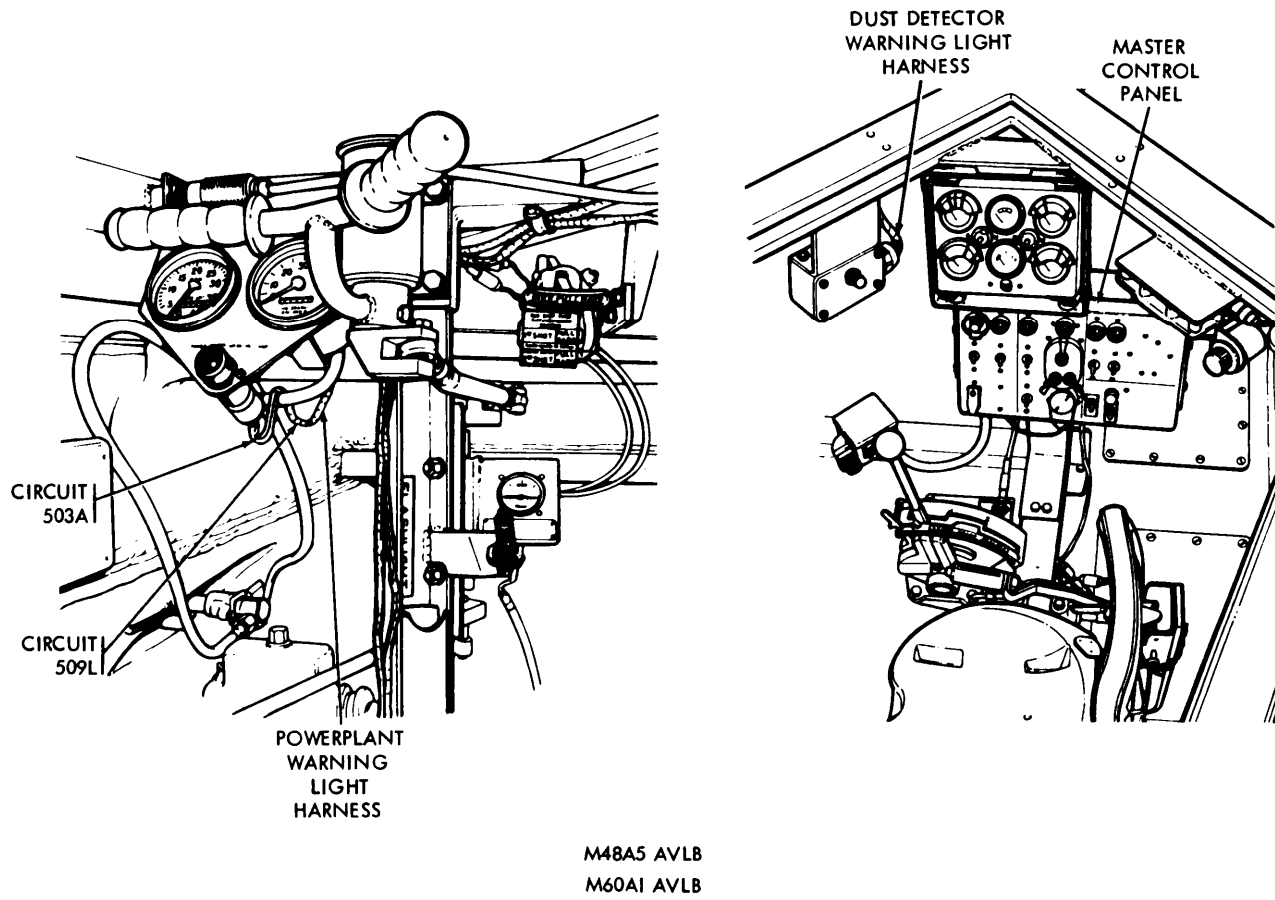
Dust detector warning light wiring harness assembly replacement (sheet 2 of 2).
